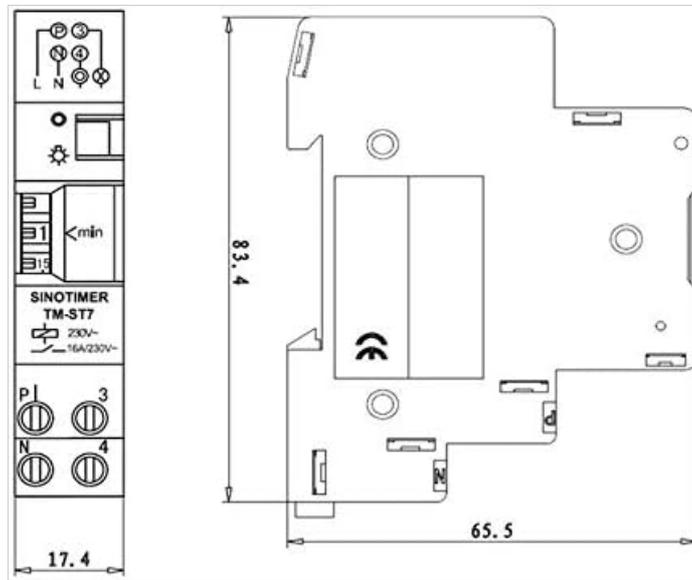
Dimensional drawing of the SINOTIMER TM-ST7 timer switch, showing measurements in millimeters.
